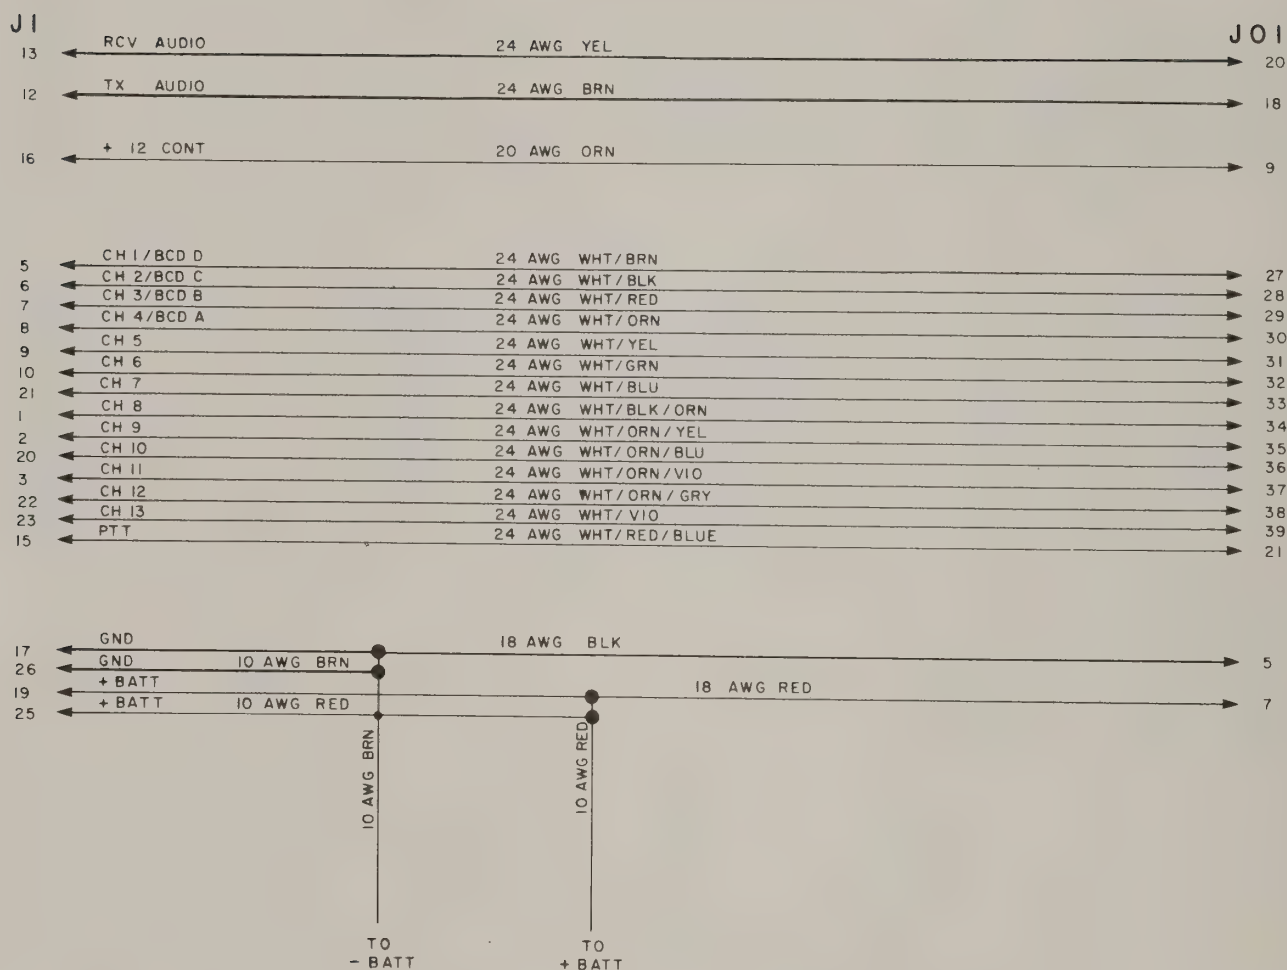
"Pigtail" Cable, Control Head Conversion (Harris and General Electric MASTR[®] Exec II) 6624-3246
